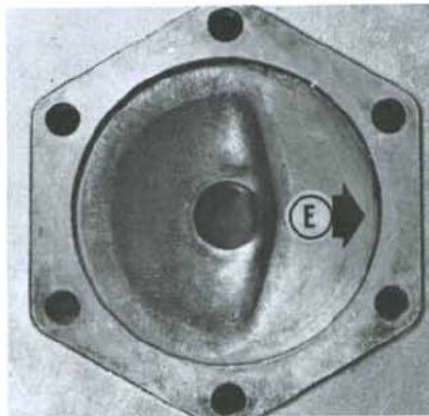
On models with squish area built into combustion chamber, flat portion should be installed toward exhaust ports as shown.
